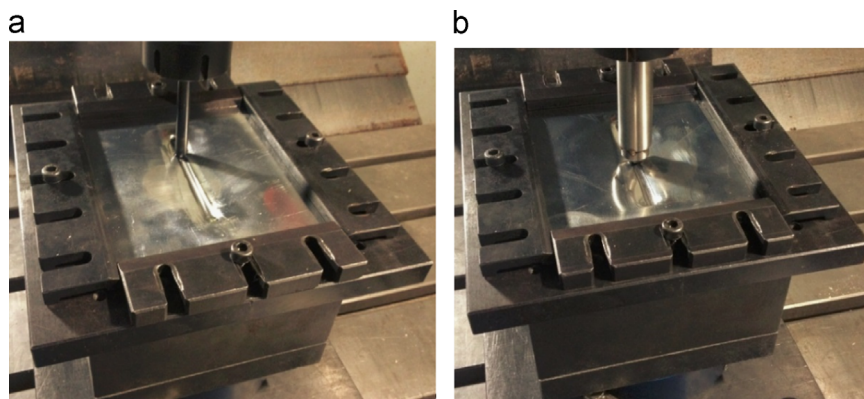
Friction test by using different tools. (a) Rigid tool and (b) VRB tool.
